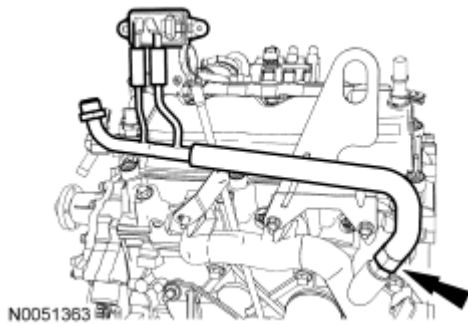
Locating Exhaust Manifold-To-EGR Valve Tube
